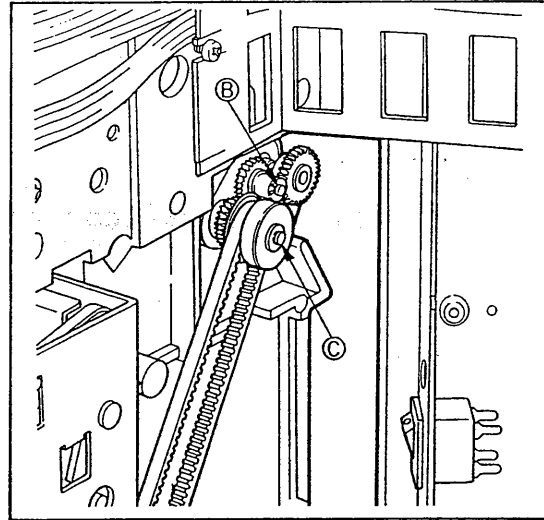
Lubricating Bearings for Chart Feed Mechanism.
